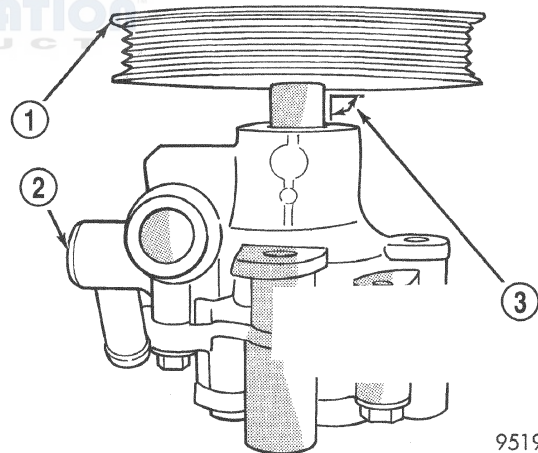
Removing Pulley From Power Steering Pump Shaft
